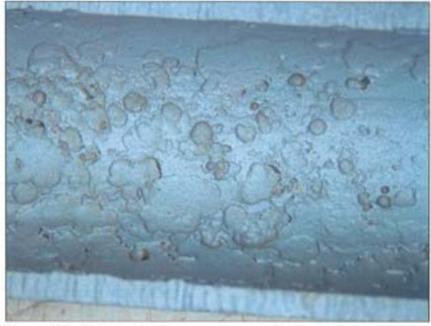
Corrosion damage on row 7 - tube 13 (bottom) after aluminum oxide blasting.
